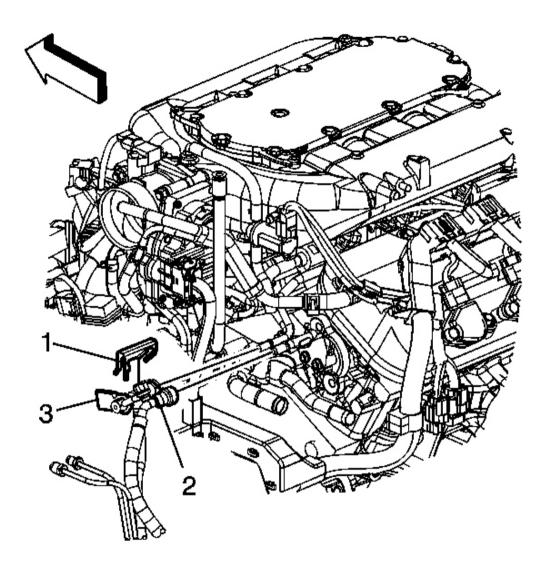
View Of Fuel Hose/Pipes Courtesy of GENERAL MOTORS CORP.
